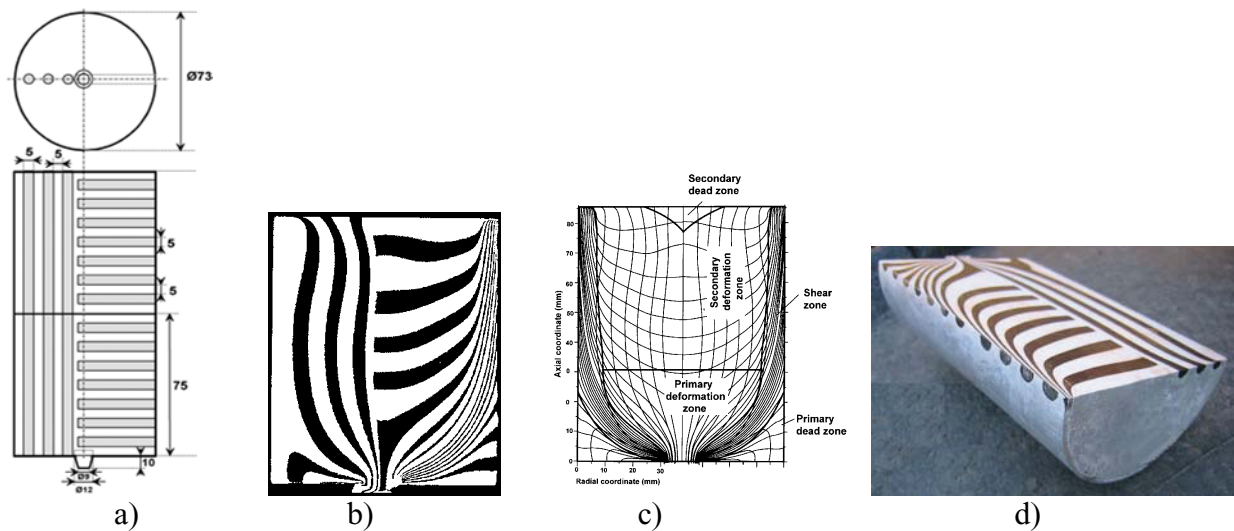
PGP-technique; a) Longitudinally sectioned gridded billet showing appearance of pins, b) Stripe pattern inside the billet after partial extrusion, c) Stripe pattern transformed into GP, d) Appearance of ends of marker pins along boundary surface of the extruded billet.
